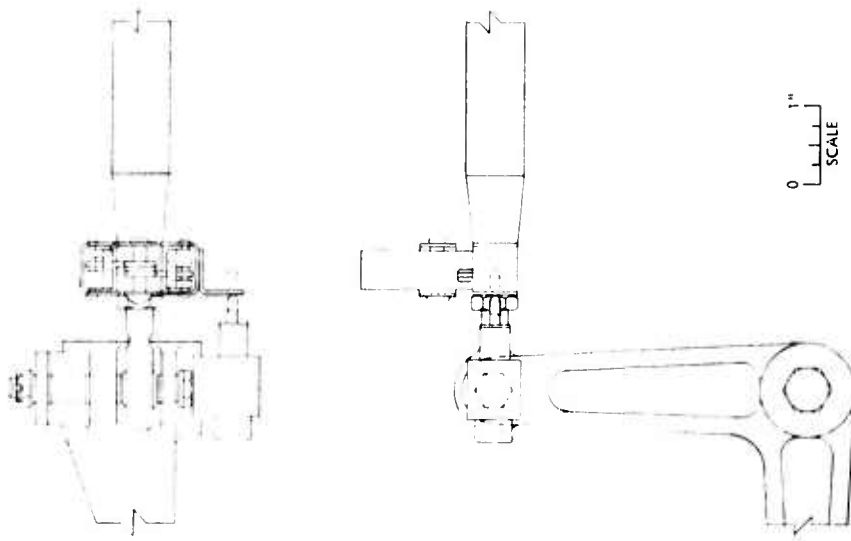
Rod End Bearing Play Sensor (Sheet 5 of 5).
